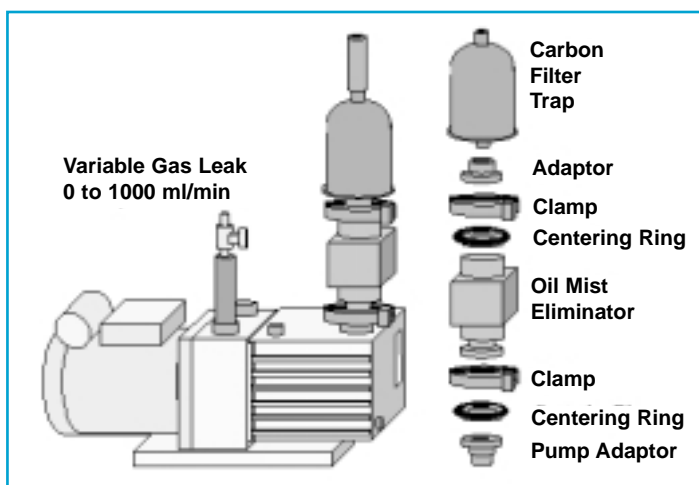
Assembly of the Two Stage Vacuum Pump Exhaust Filtering System
